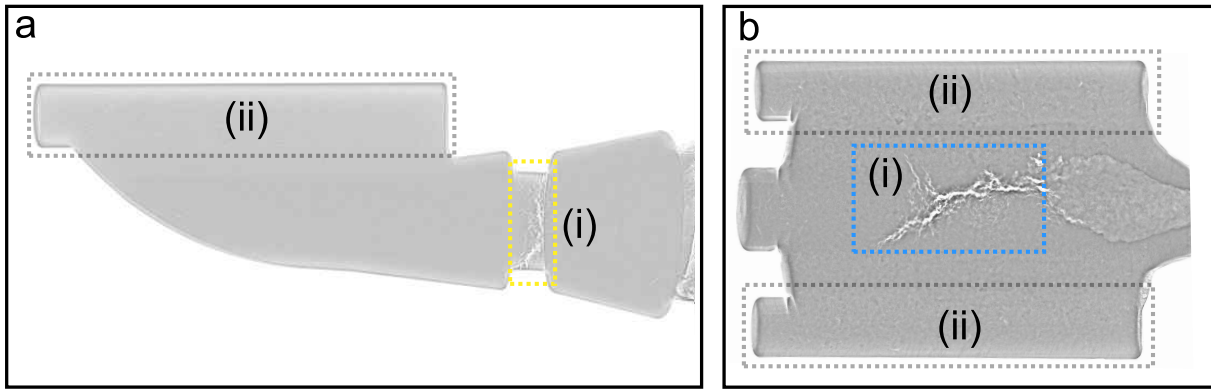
X-ray scans of cracks (i) observed in investment castings of Fe-26Al-4Mo-0.5Ti-1B (a) and investment castings of Fe-23.5Al-4Mo-0.5Ti-1B (b). Tensile blank sections (ii) appear crack-free in both cases. Adapted from [143]
